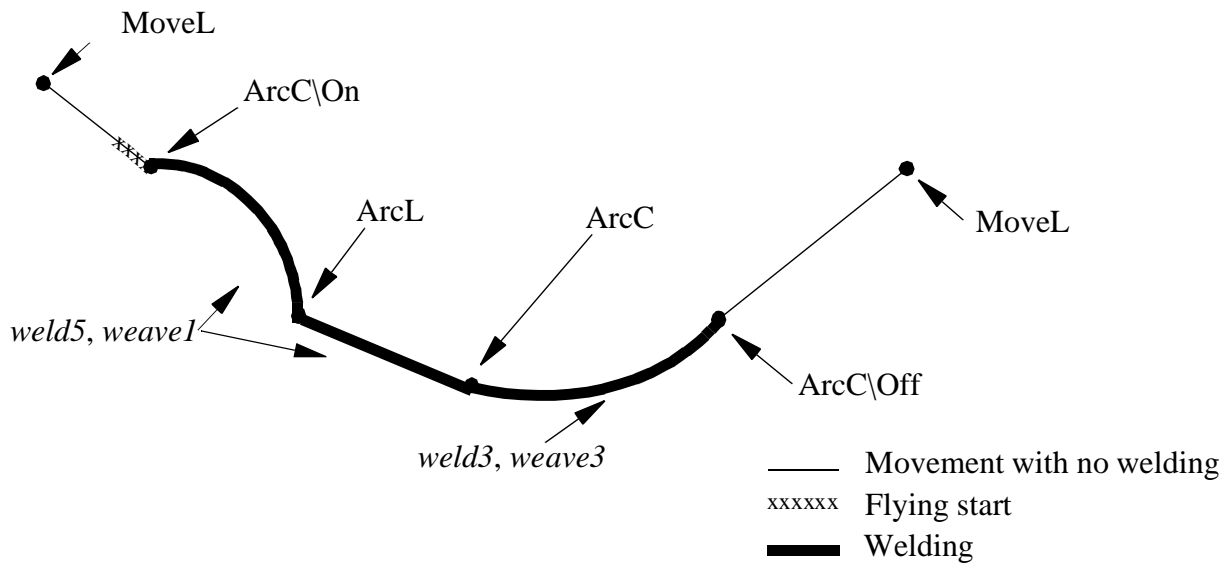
The direction and weld data can be changed by programming several arc welding instructions.
